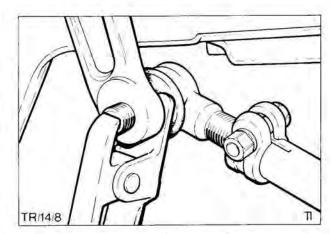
Separating drag link and cranked arm joint using tool 13 006
